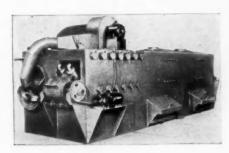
Combination drum and conveyor type washing, rinsing and drying machine. (Courtesy N. Ransohoff, Inc.)
